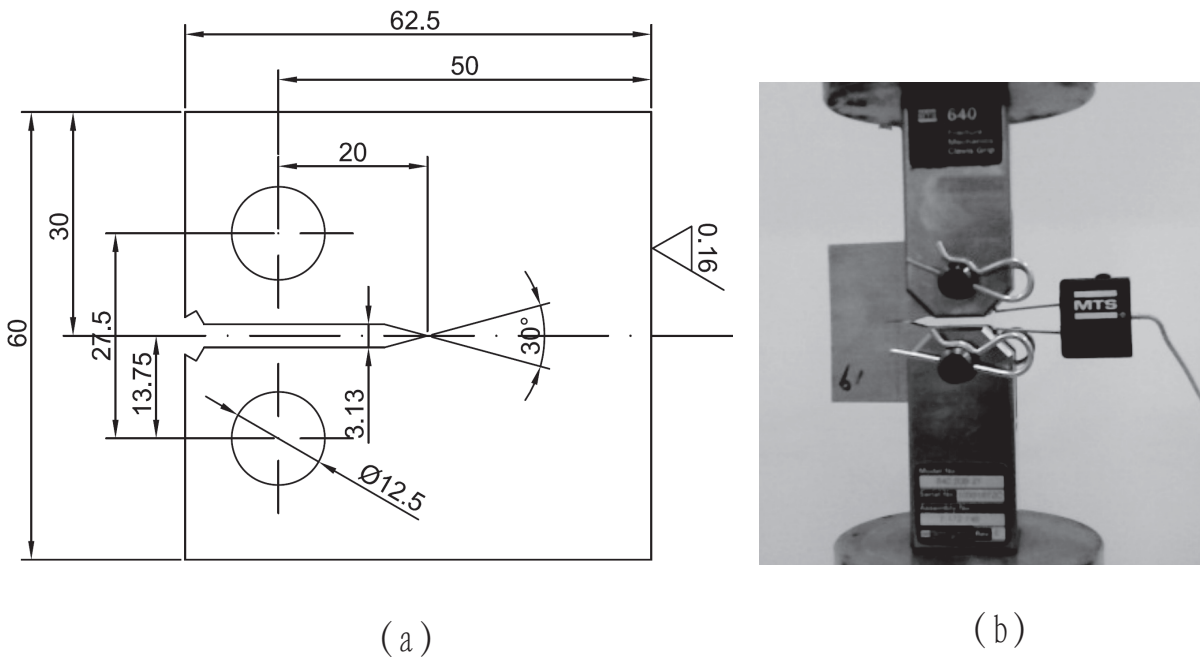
(a) The dimensions of C(T) specimens. (b) Fatigue crack growth rate measurement of a C(T) specimen by using the COD method in MTS 809 servo-hydraulic testing system.
